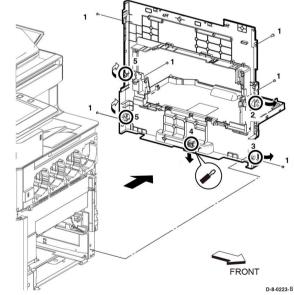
Remove the right side cover assembly (C505/C605/C605_Tall)
